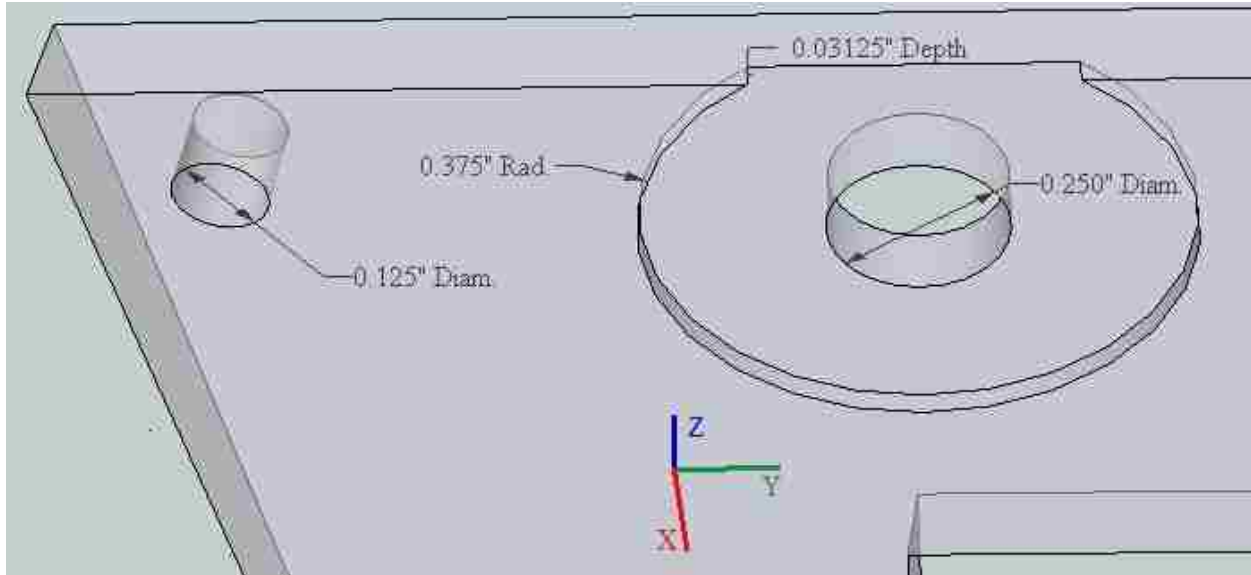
Orthogonal view of the 20x20 cm² middle trimmer aluminum plate illustrating hole dimensions.
